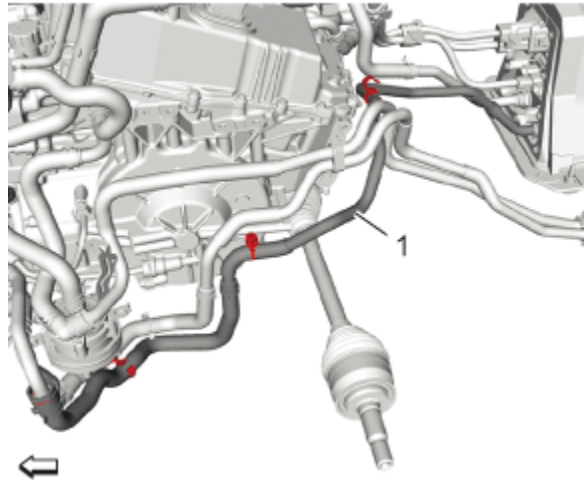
Drive Motor Battery Coolant Outlet Hose
